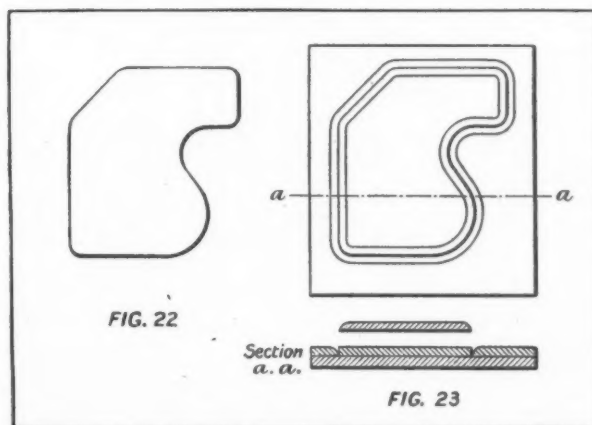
Blank to be Produced. Fig. 23. Tool Required to Produce the Blank with Clean Edges
